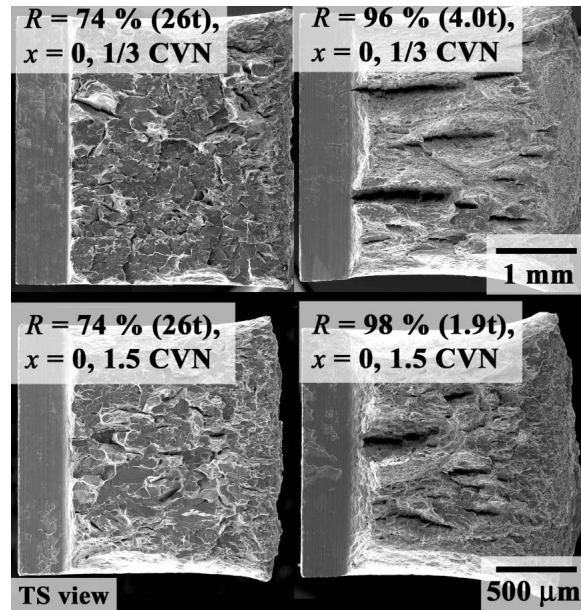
Fracture surfaces after the impact tests. Notch is located at the left side.
